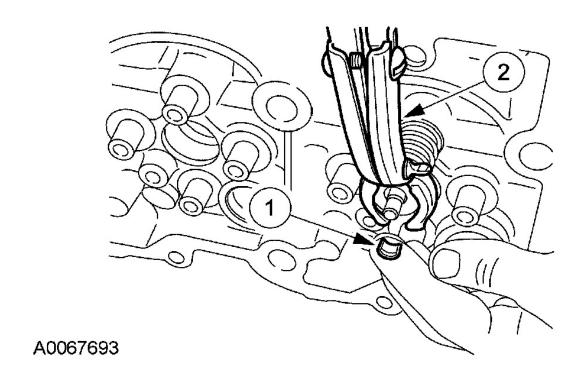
Removing Valve Spring Retainer Keys Courtesy of FORD MOTOR CO.
